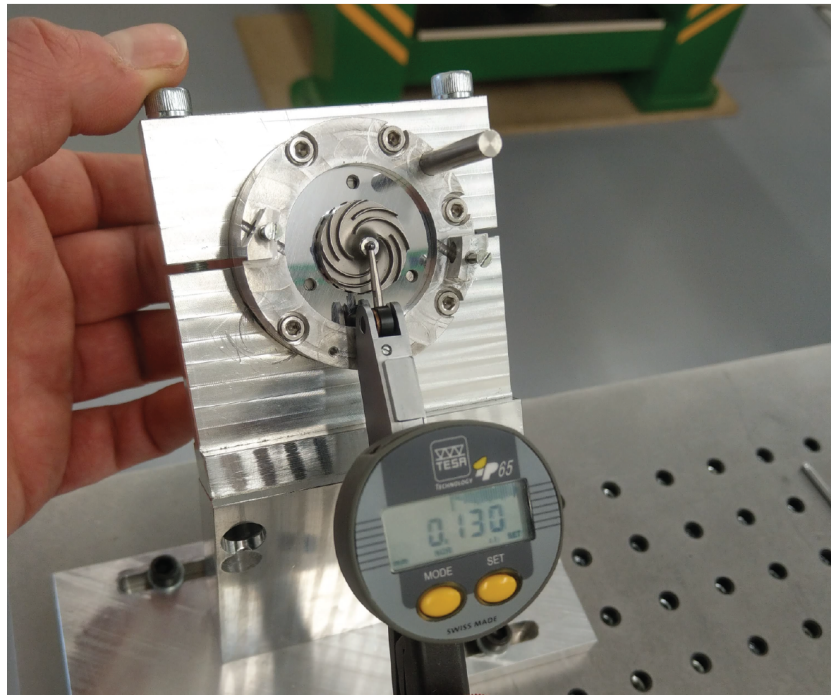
Measurement of axial rotor clearance using a Tesa IP65 digital dial test indicator
